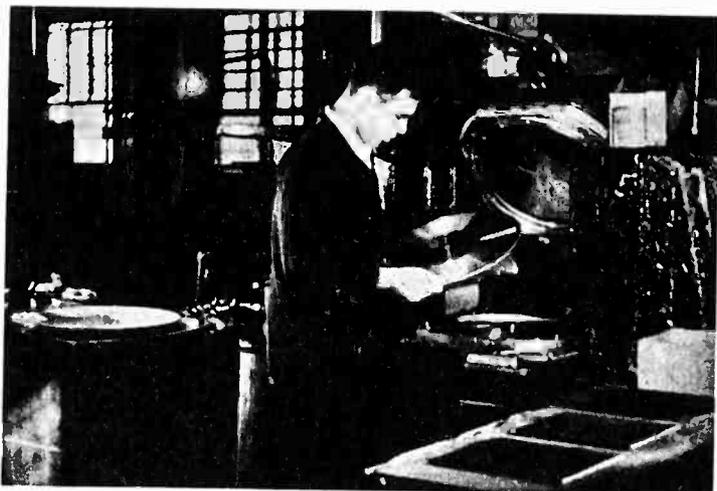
Record press, showing finished record just removed from the dies, and record stock heating on the steam table
